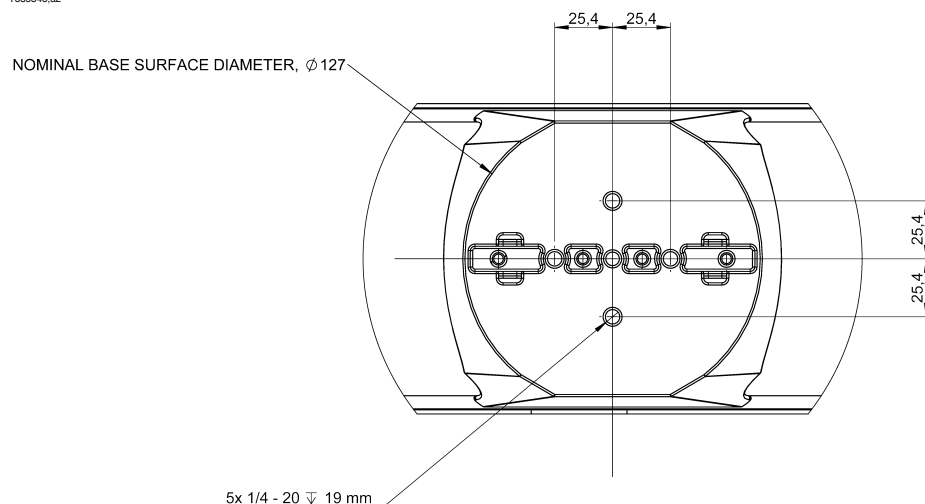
FLIR A3xx f series camera mounting (mm)
